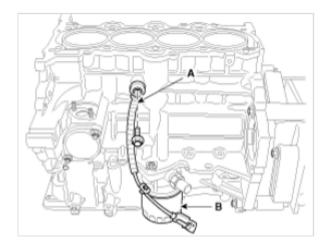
Identifying Knock Sensor And Oil Filter Courtesy of HYUNDAI MOTOR AMERICA
